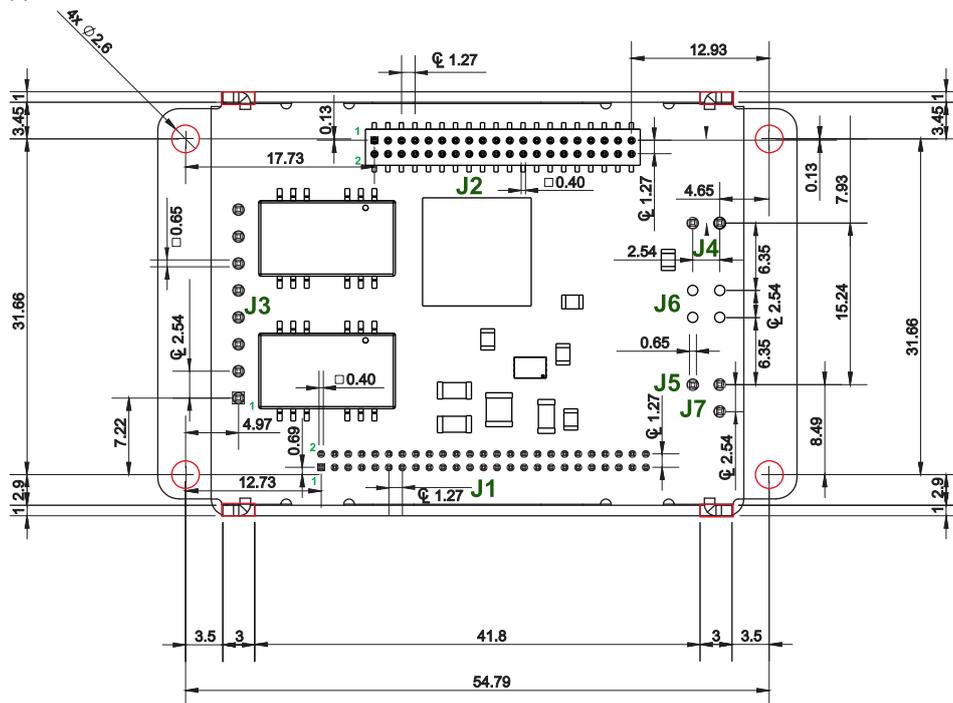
iMOTIONCUBE CAT-STO PCB Footprint
